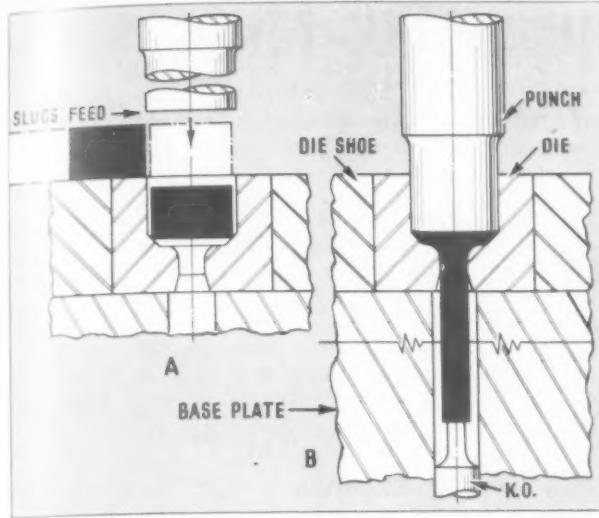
Press forging—a technique in extrusion that revolutionized the manufacture of poppet valves.
